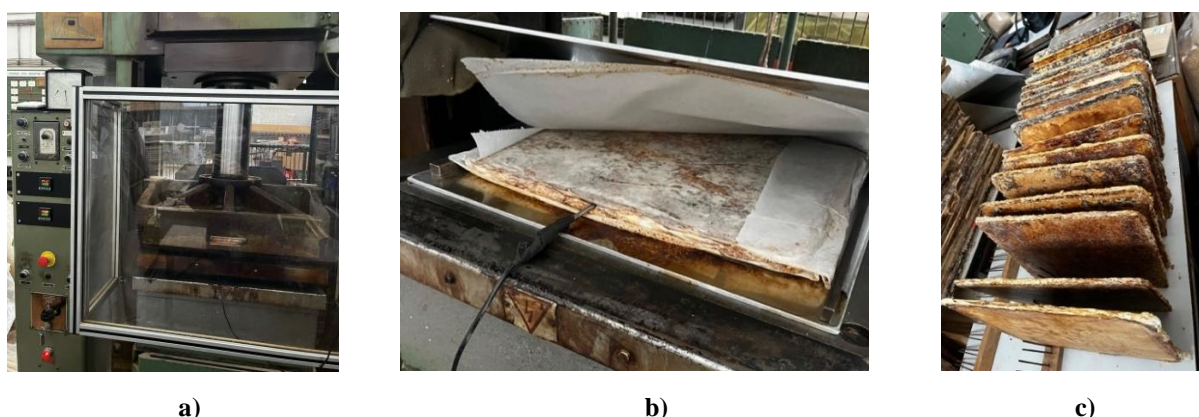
Samples pressing) Hydraulic pressing machine DS-C8J-100 in TUZVO, b) pressing c) final plates
